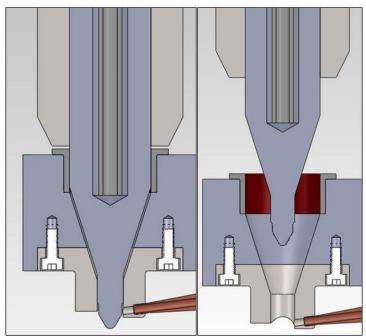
Both pictures show a cross section view of the Probe Holder, Probe, Shoulder Holder, Shoulder and bearing. The one on the left is with no stroke and the one on the right with full stroke on the hydraulic cylinder
